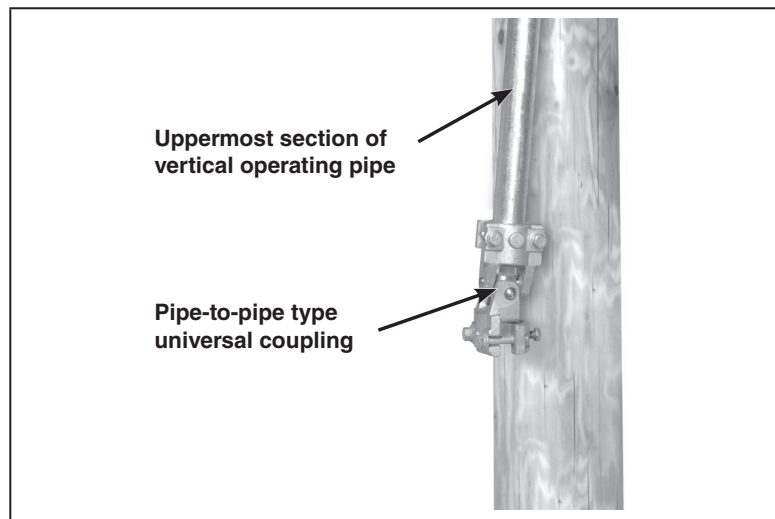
Attach the pipe-to-pipe type universal coupling to the lower end of the vertical operating pipe.
